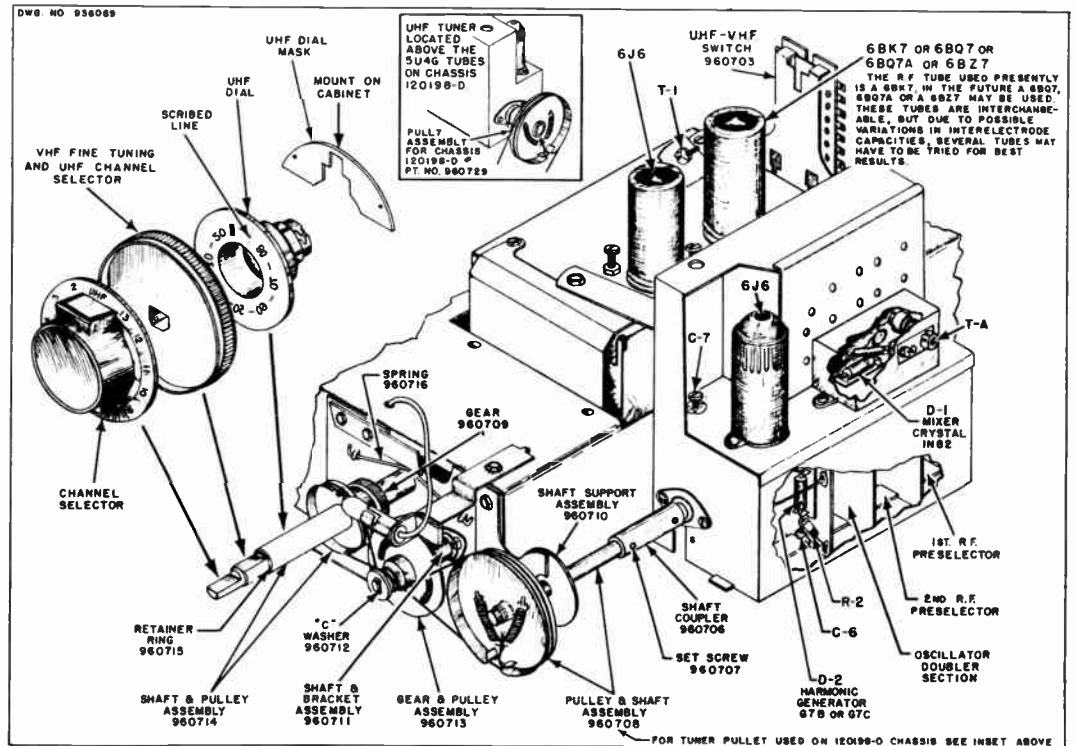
UHF-VHF TUNER ASSEMBLY DRAWING
